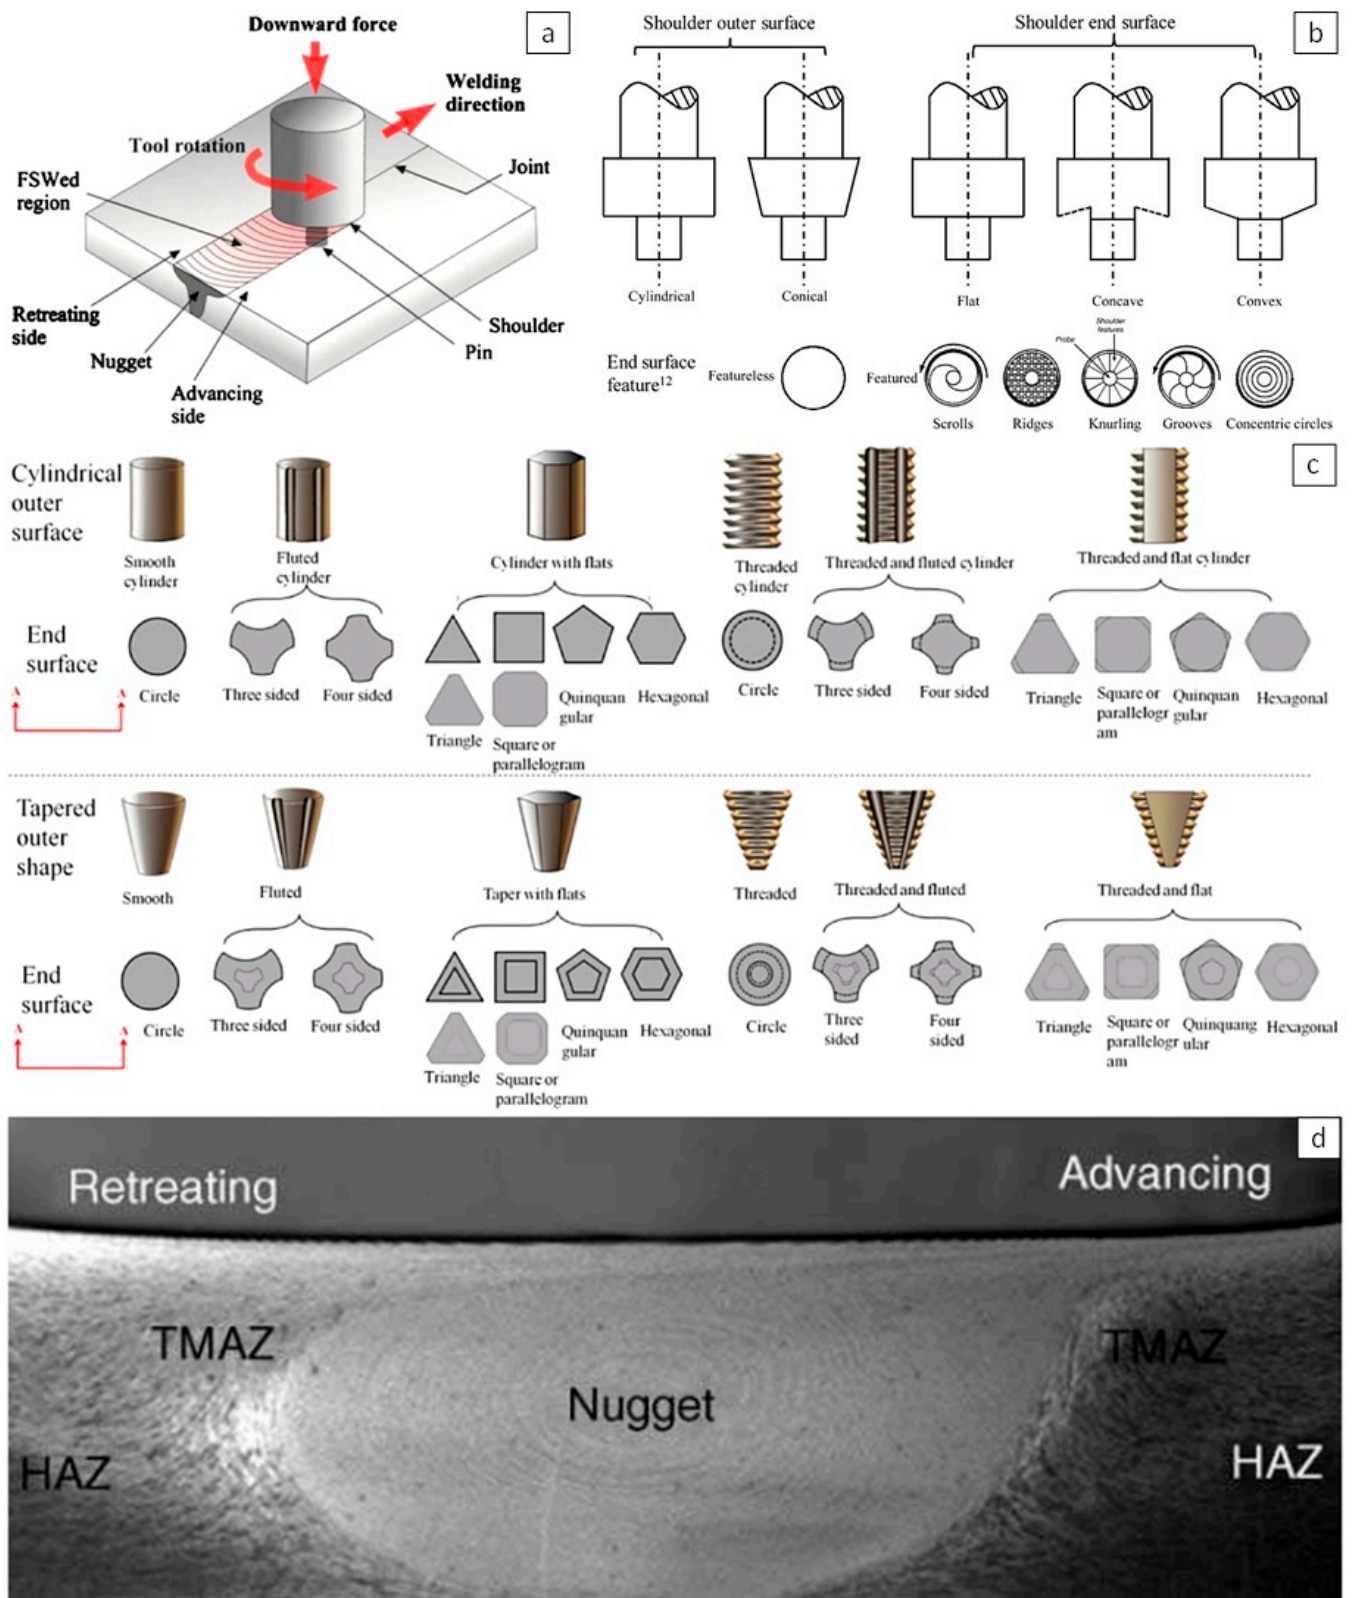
Friction stir welding, (a) a schematic diagram of friction stir welding [43], (b) shoulder shape and end face features [43], (c) different probe designs [43], and (d) a typical macrograph showing various microstructural zones [42]. Reproduced with permission from [42], Elsevier, 2005. Reproduced with permission from [43], Taylor and Francis, 2012.
